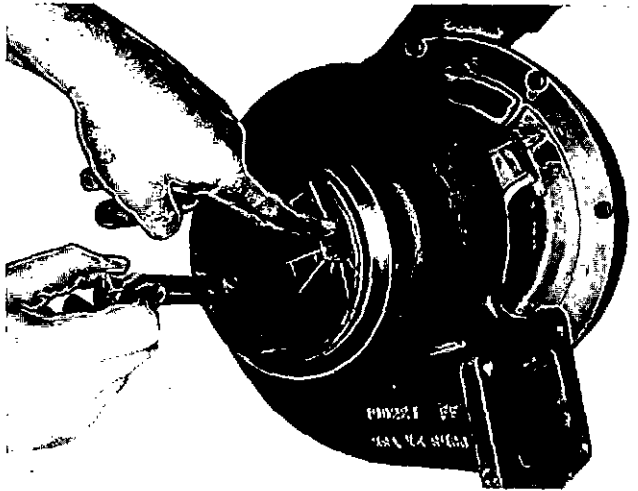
, (VTST49). Check the turbine end radial clearance
